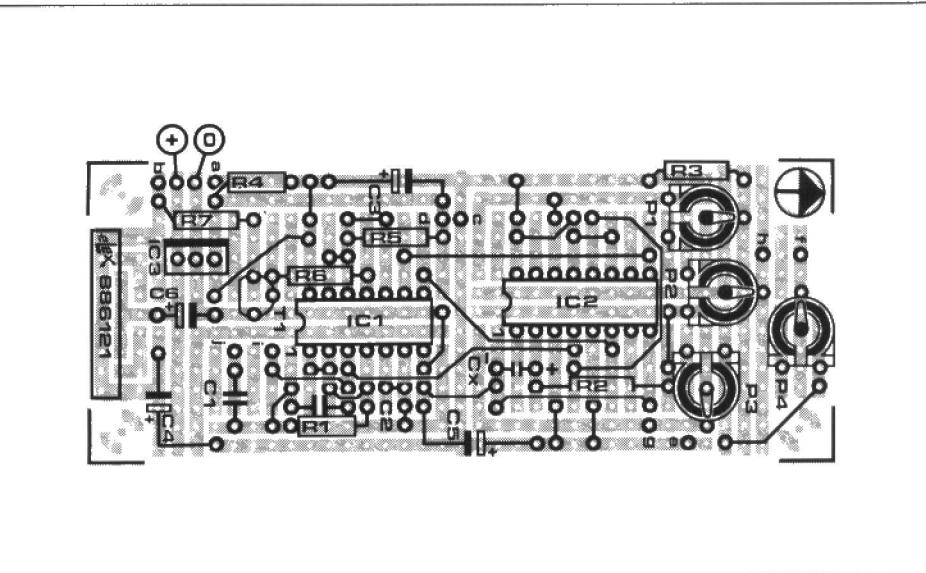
Showing how the components are mounted on universal prototyping board size-1 (UPB-s1).
